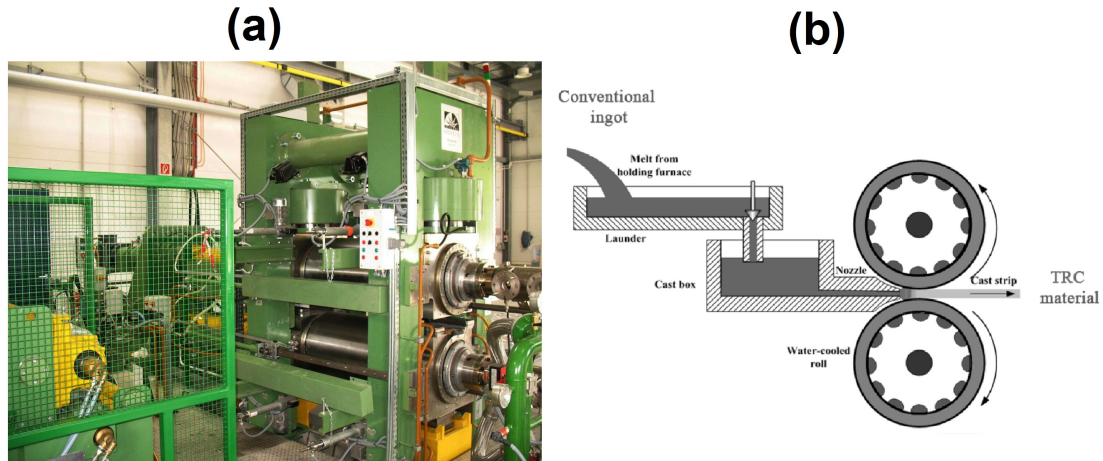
Illustration of twin-roll casting process [151]: a) twin-roll caster and b) scheme of the twin-roll casting process.
